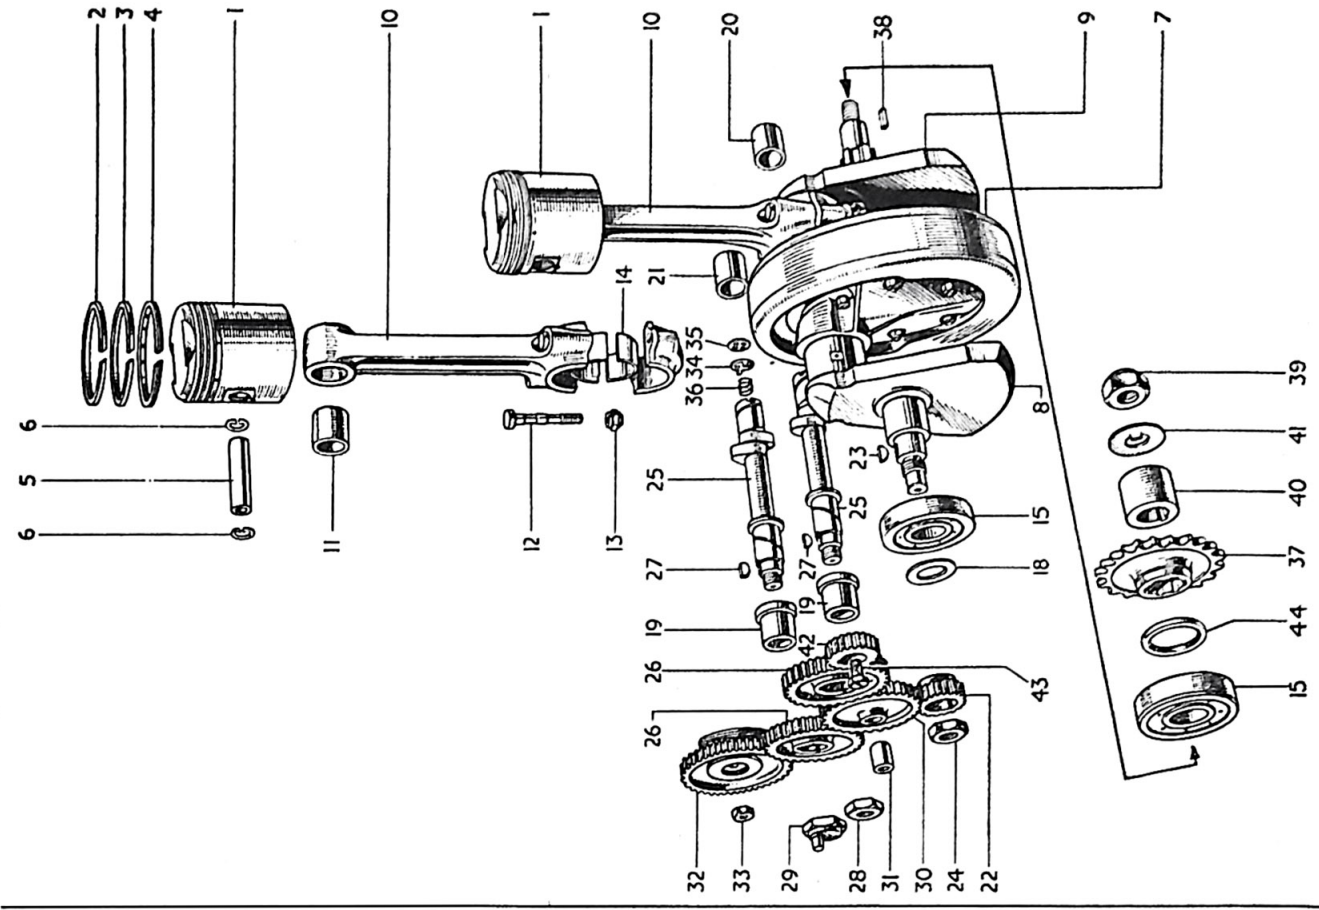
CRANKSHAFT, CONNECTING RODS, PISTONS, TIMING GEARS, etc.
